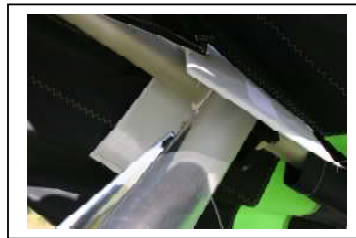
Section 4. Place U-Bracket Padding Inside Sail
